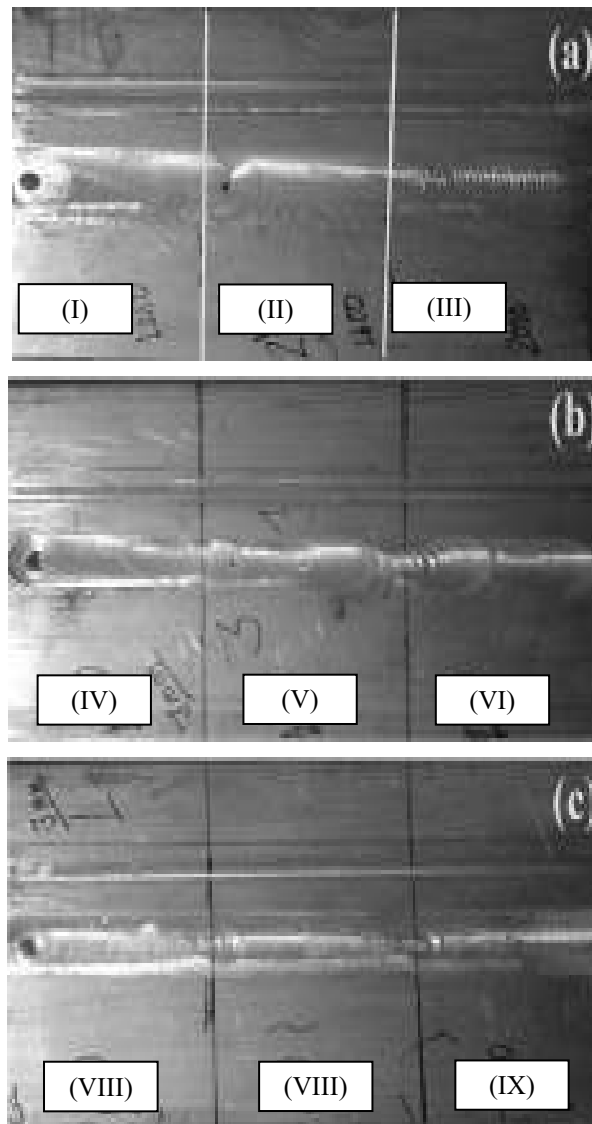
Friction stir welded workpiece at different parameters.
